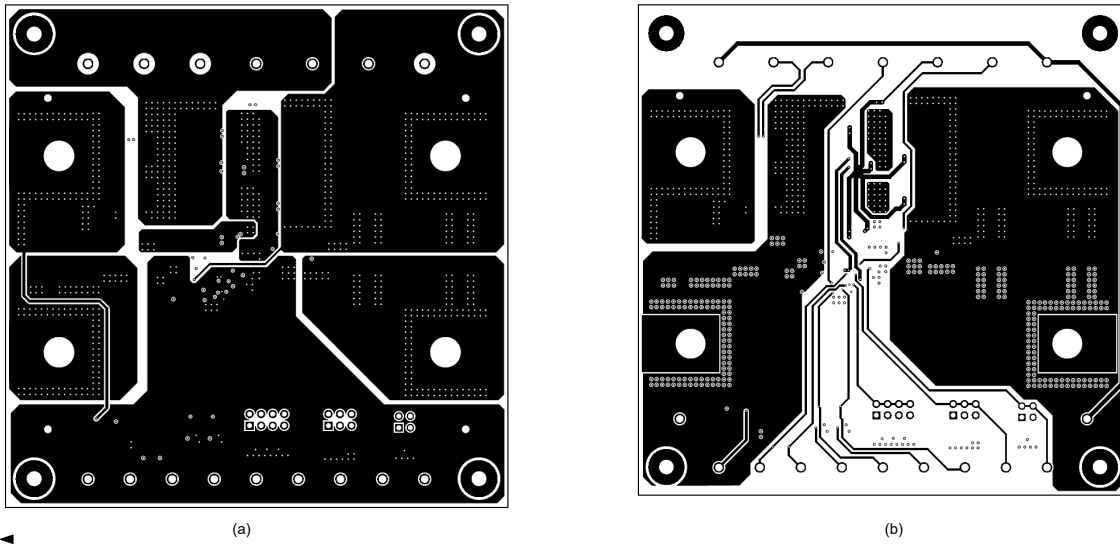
TPS48111Q1EVM Board (a) Inner Signal Layer (b) Inner Routing Layer
